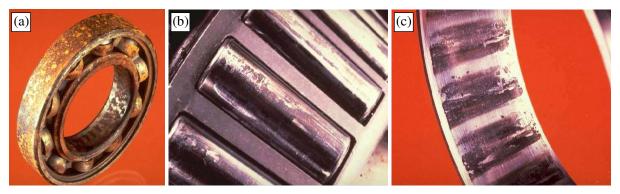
Bearing surfaces damaged by corrosive wear: (a) corrosion pits and rust all over the bearing and (b) and (c) discolouration of contact areas on rollers and outer ring.
